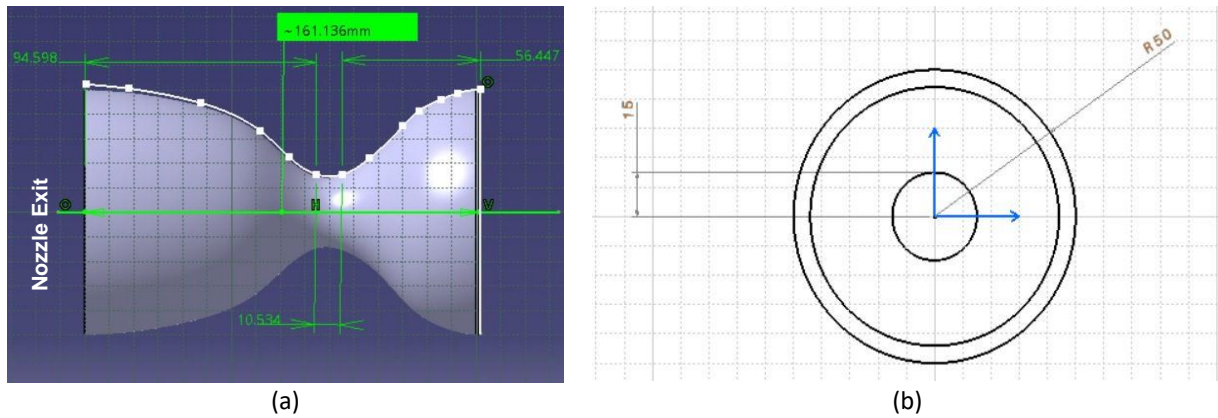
Rocket nozzle design and dimension of (a) cross-section and (b) exhaust chamber
